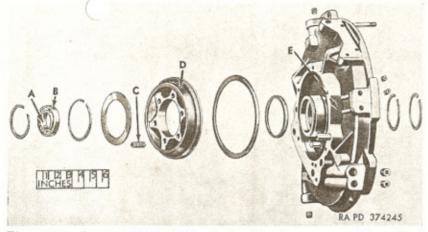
Repair and rebuild standard points of measurement for output shaft bearing retainer components (303M).
